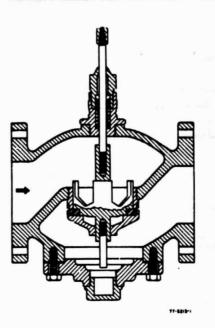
Flanged, Cast Iron, Direct Acting, 125 psi Valve Body 2-1/2 thru 6 Inches.
